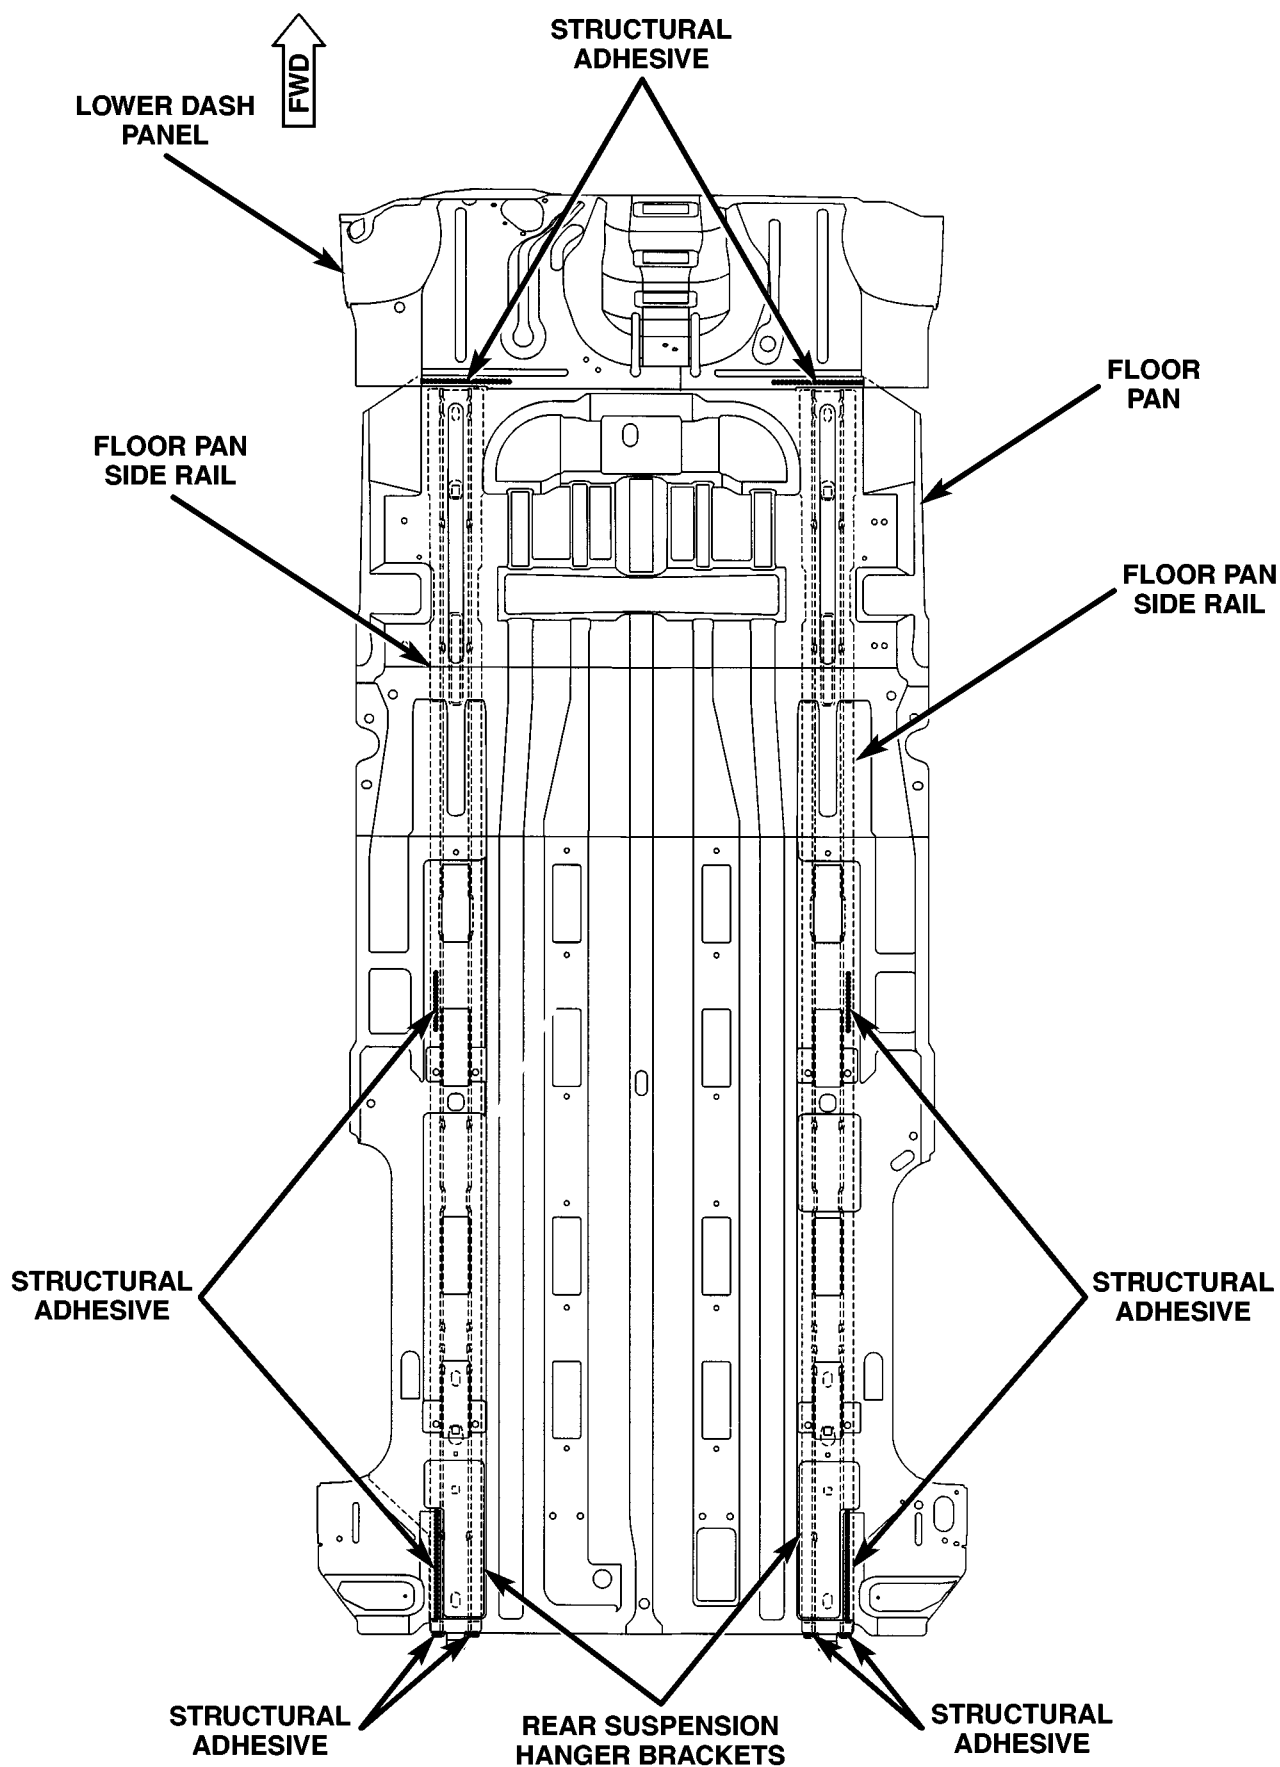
FLOOR PAN - LONG WHEEL BASE ONLY
